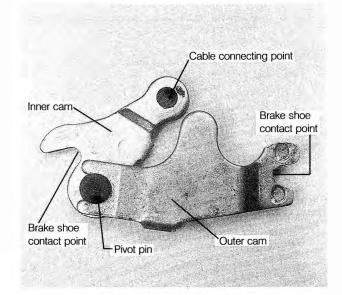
Parking brake actuator components used on cars with rear disc brakes.
